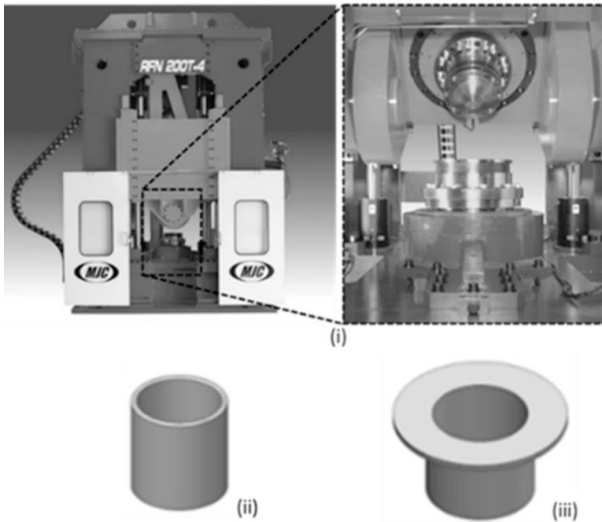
(i) AFRC's MJC 200T-4 rotary forge test rig, (ii) cylindrical preform, (iii) formation of 90° bend flange using cold rotary forging
